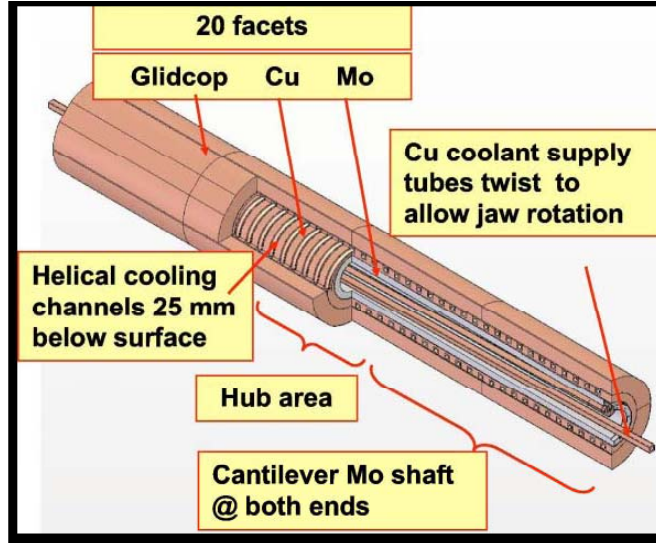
Cutaway of SLAC jaw showing outer jaw surfaces and cooling tube routed through the center of the Molybdenum shaft.
